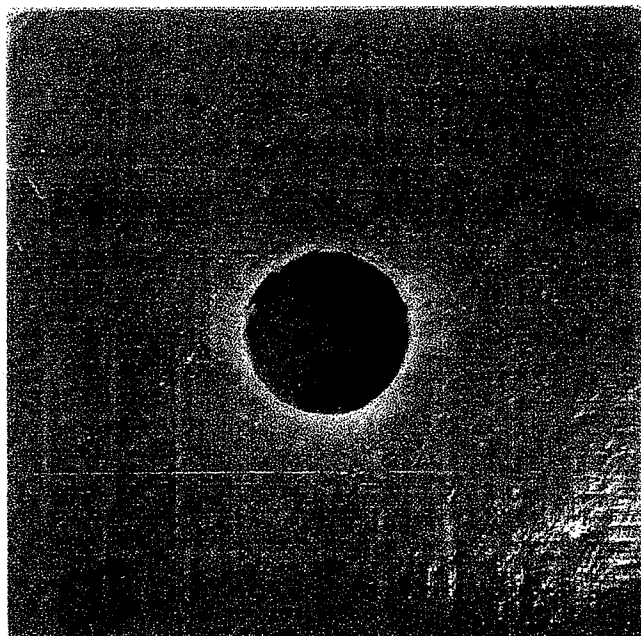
Typical Damage to Top Face Sheet in Specimens
